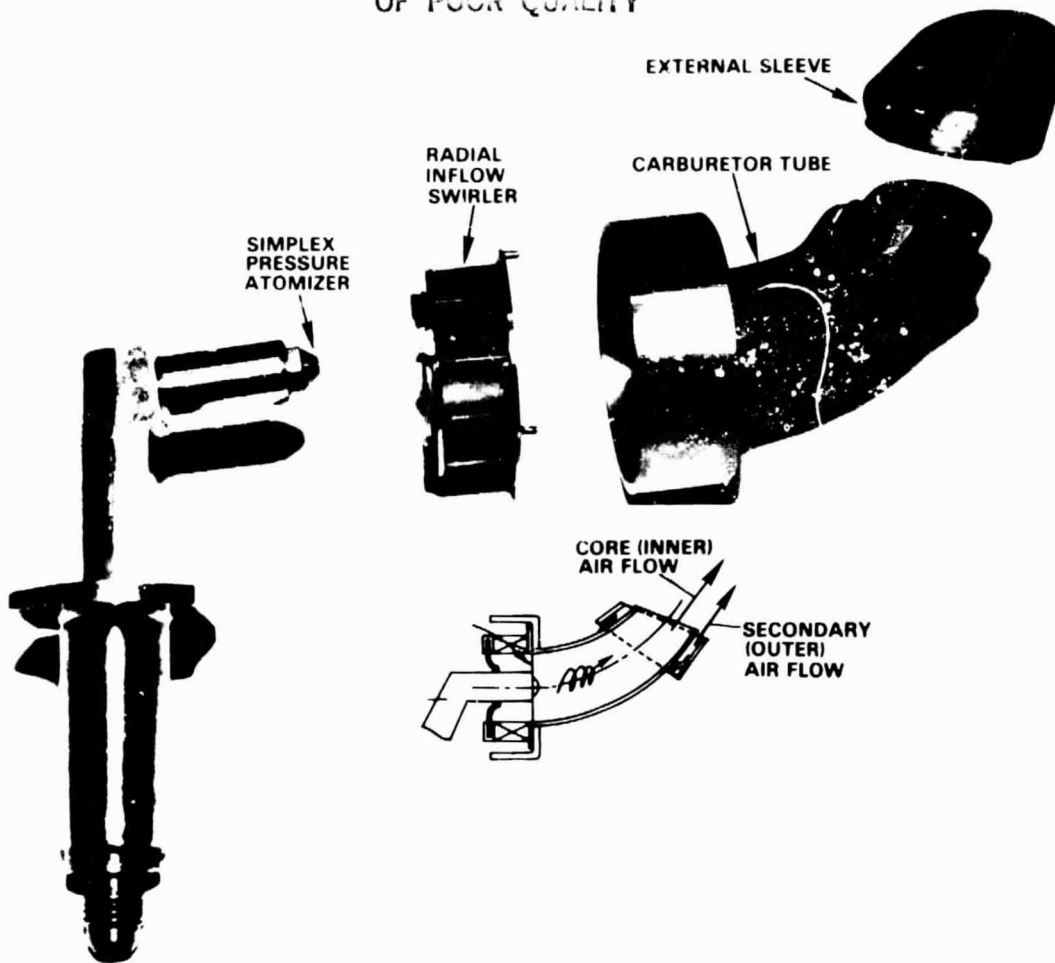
Main Zone Fuel Injector - Carburetor Tube Assembly Features
